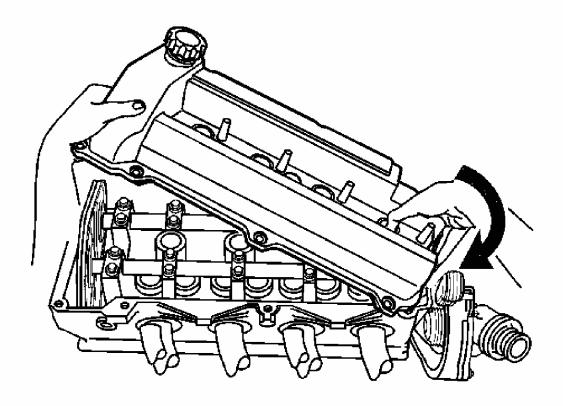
Positioning Intake Camshaft End Through Hole In End Of Camshaft Cover
